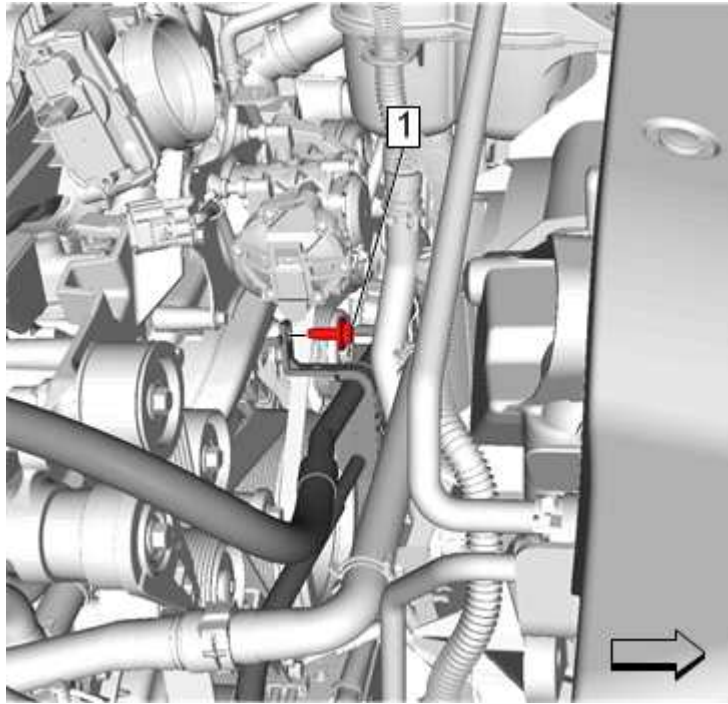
Air Conditioning Compressor Hose Bracket Bolt
